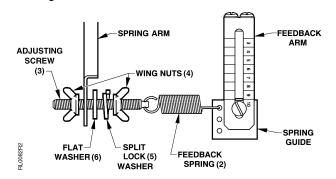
Attaching the Adjusting Screw to the Spring Arm.
